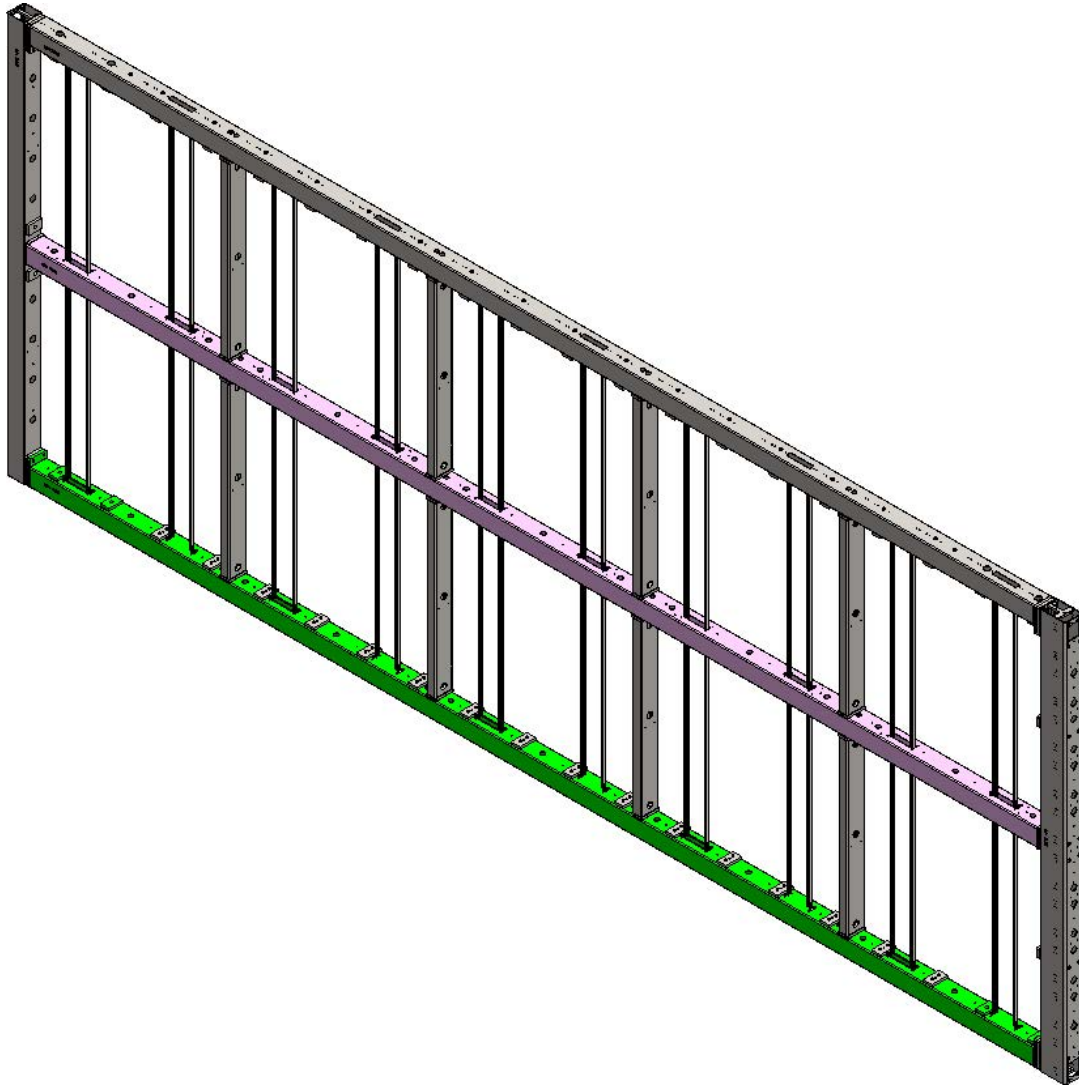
A [DUNE APA](#) frame showing the 13 separate stainless steel tube sections that bolt together to form a complete frame. The long tubes and foot tube are a 10.2×10.2 cm (4×4 inch) cross section, the head tube is 10.2×15.2 cm (4×6 inch), and the ribs are 10.2×5.1 cm (4×2 inch).
